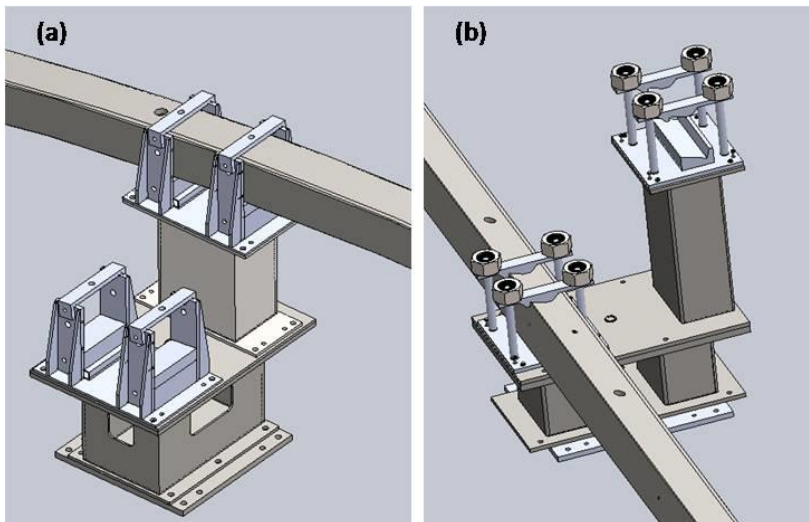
SCC case welding fixture (a for large arc segment, b for linear segment)
